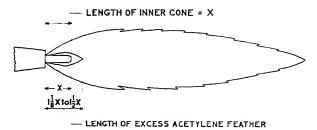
Diagram showing the adjustment of the excess acetylene flame.
